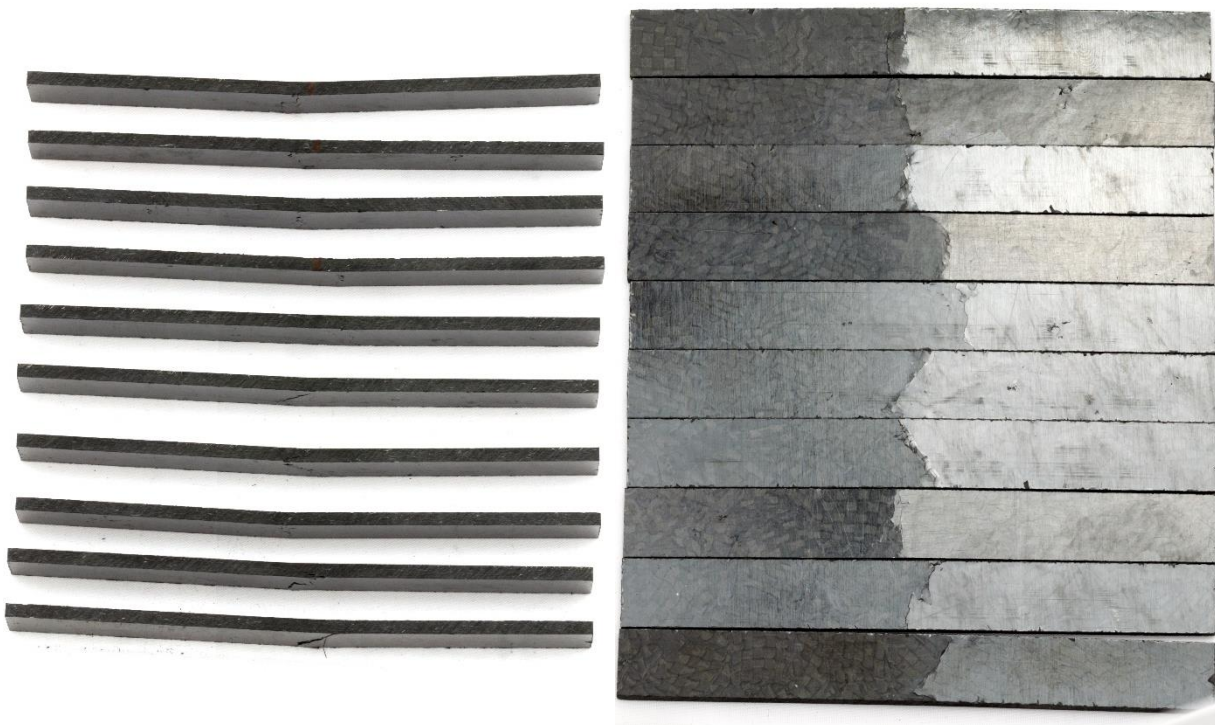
M40 Side view (left) and bottom view (right) 1-10 (top-bottom).
